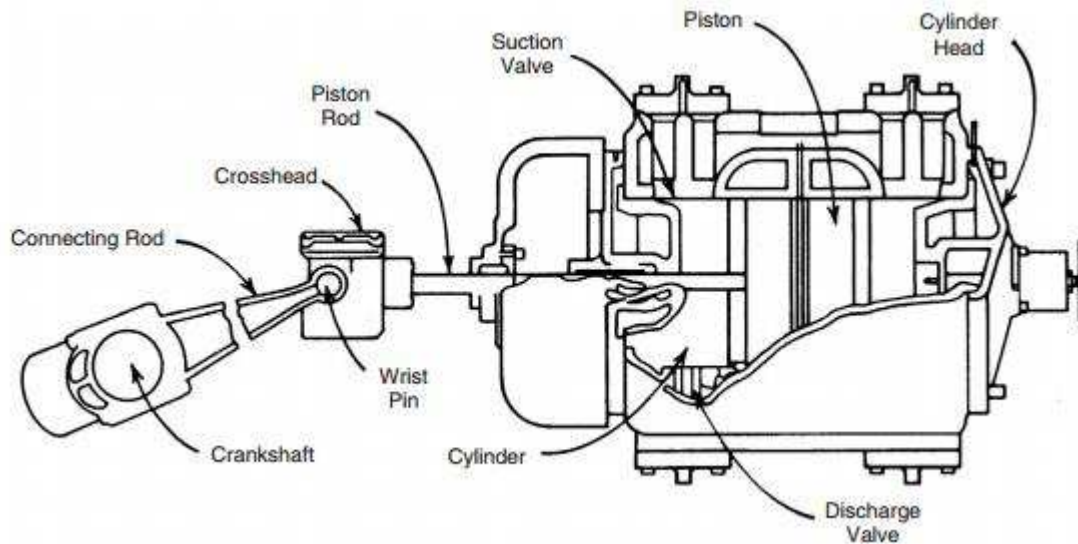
Parts of the reciprocating compressor [28, p.10]
